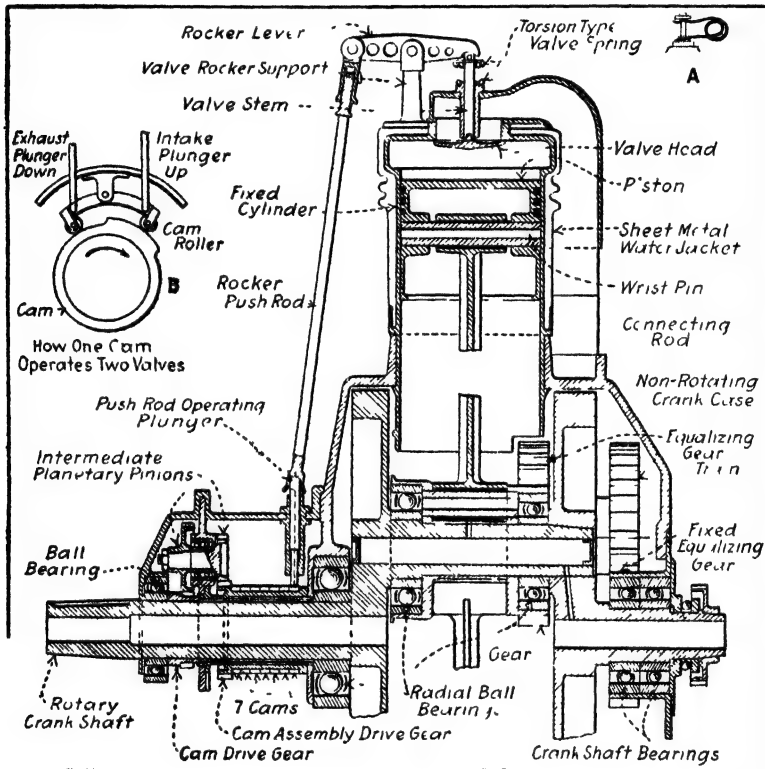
Sectional View Showing Construction of the Canton and Unné Water-Cooled Static Radial Cylinder Engine.
